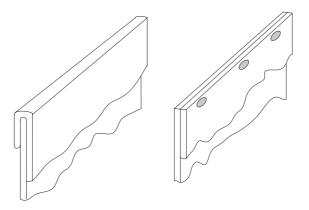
The detailed design of a product will be affected differently when using clinching and spot welding.
